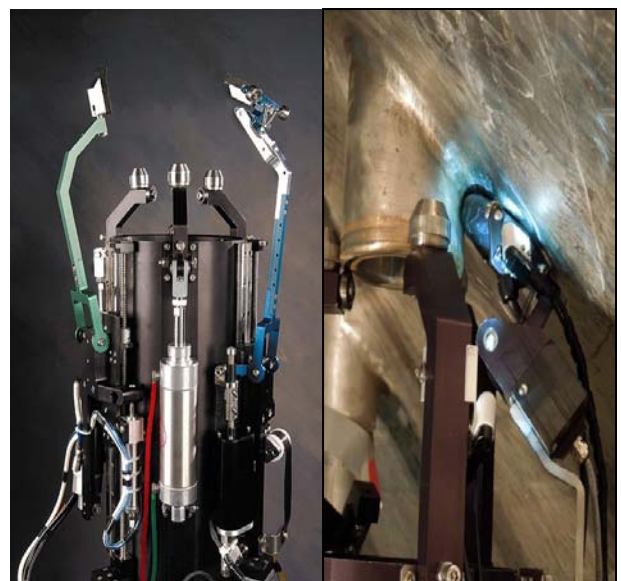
J-WELD SCANNER WITH TOUCH-POINT FOLLOWER (LEFT) AND CLOSE-UP OF MOUSE-PROBE
